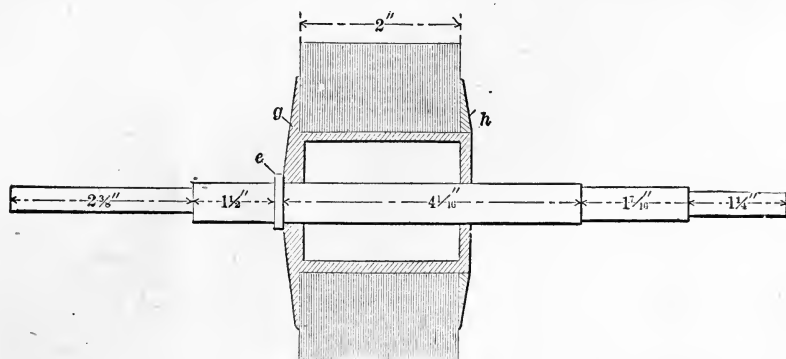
ARMATURE SHAFT AND AXIAL SECTION OF ARMATURE CORE.
